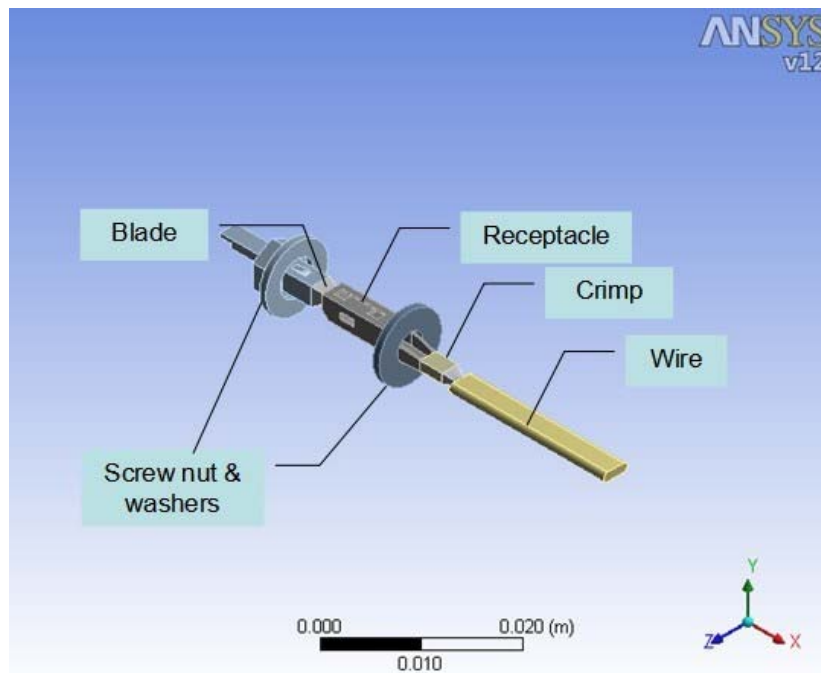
Assembly view of 3D connector model with 2cm wire
